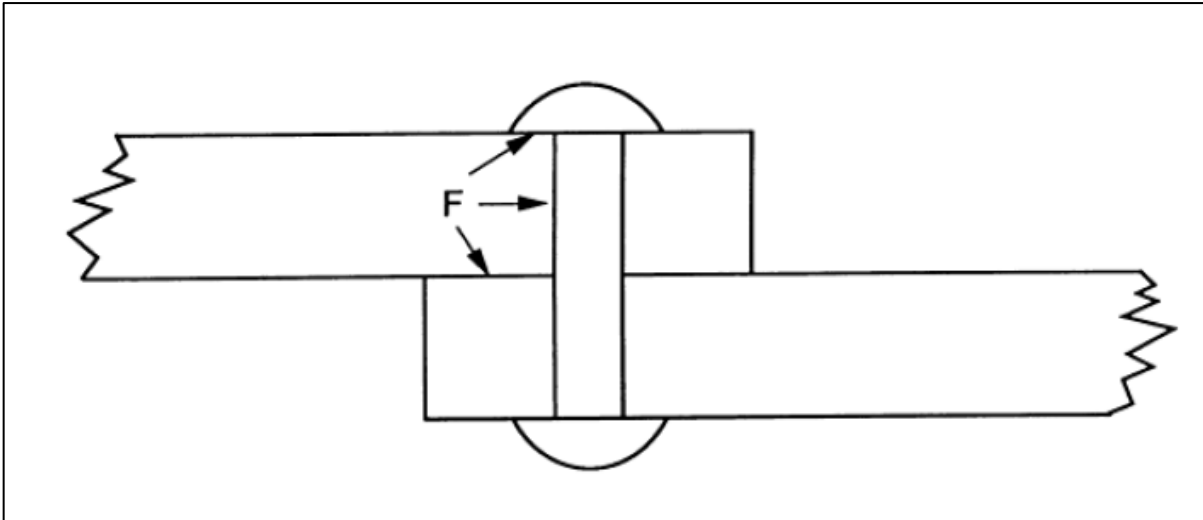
An aluminium-steel joint by rivet indicates the possible fretting areas reproduced with permission of the publisher [111].
